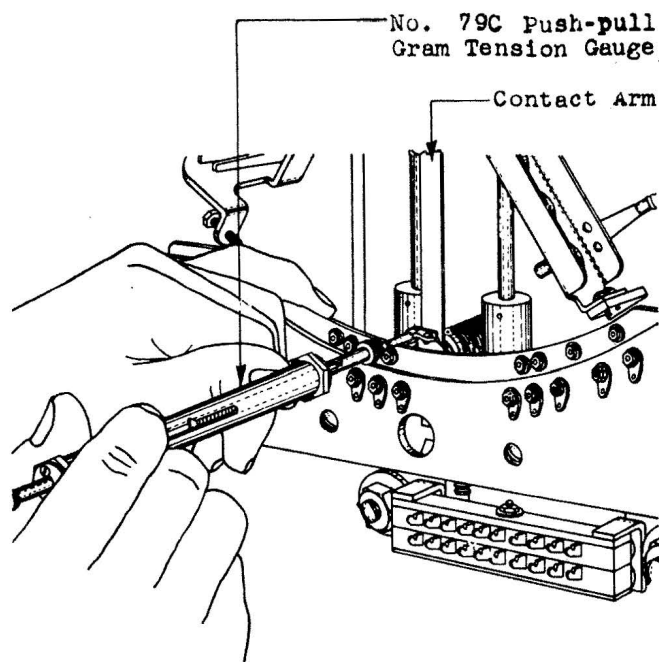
Method of Checking the Contact Arm Tension with a No. 79C Push-pull Gram Tension Gauge
